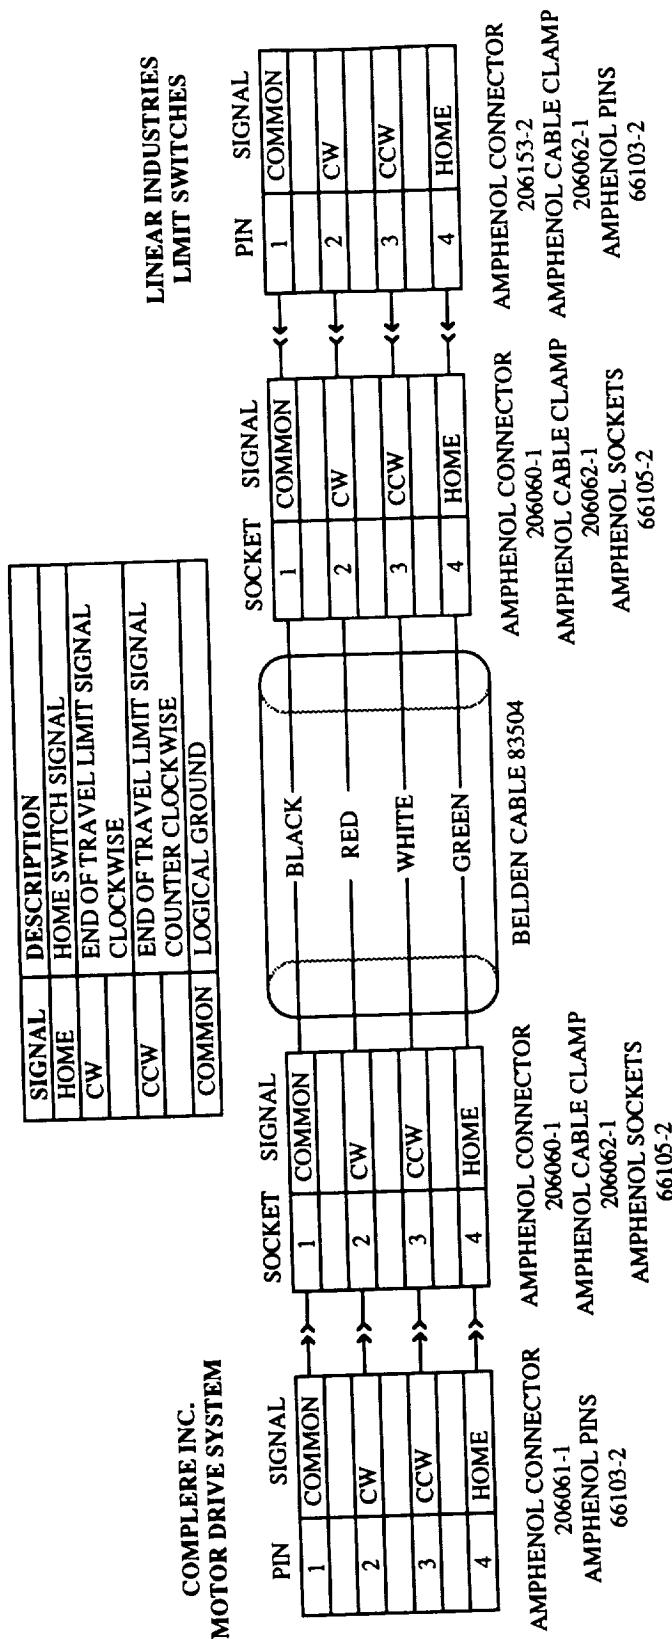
Motor Drive System to Linear Industries Limit Switches Cable.
